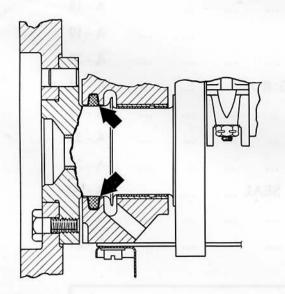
Location of crankshaft rear bearing oil seal in the crankcase and main bearing cap (indicated by arrows)
